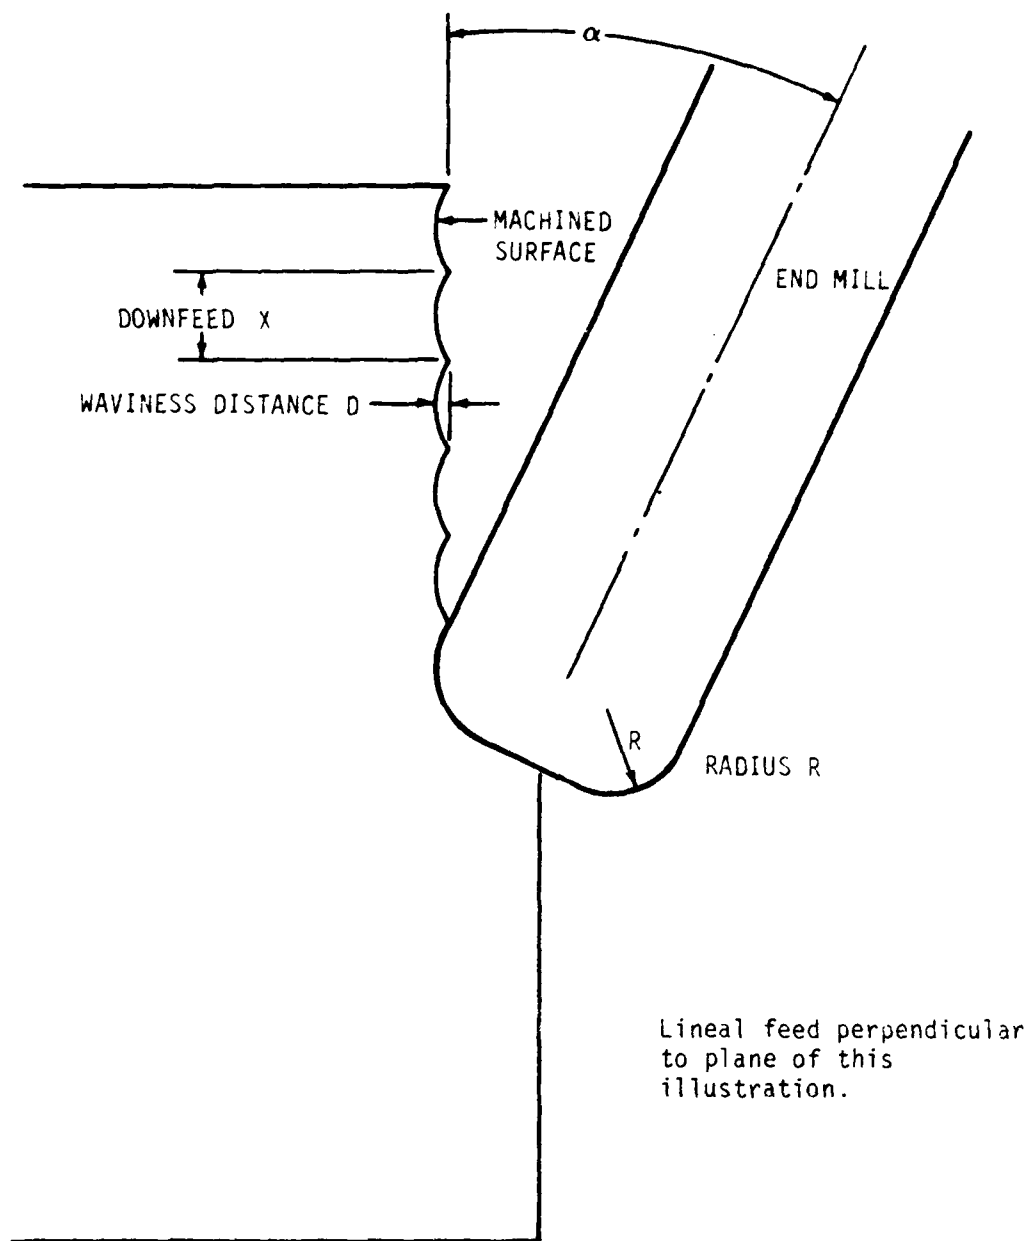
Illustration of Surface Waviness Produced by End Mill at Small Angle to Plane of Machined Surface.
